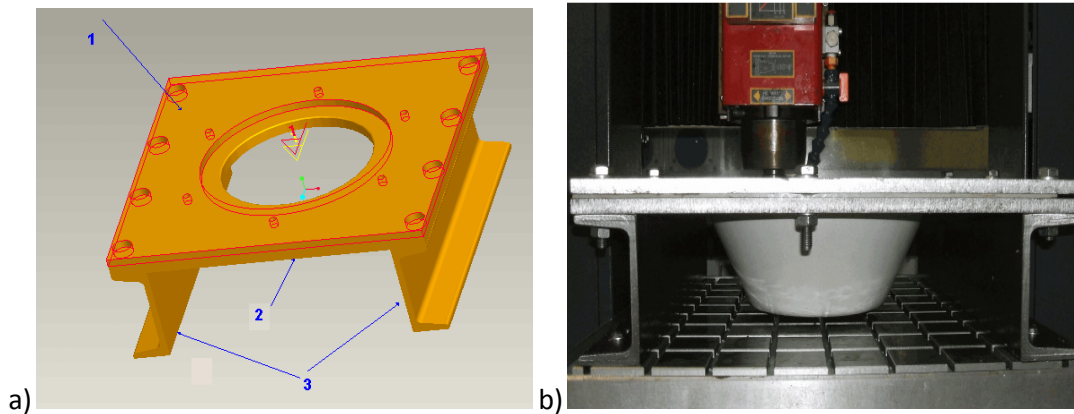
Fixture and jig system for SPIF process with polymers
